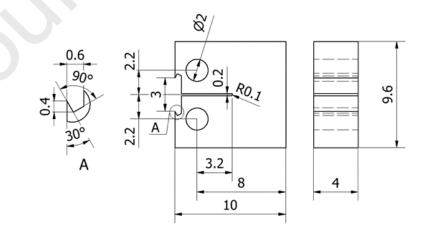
The geometry of the mini-CT specimens. Dimensions in mm.
